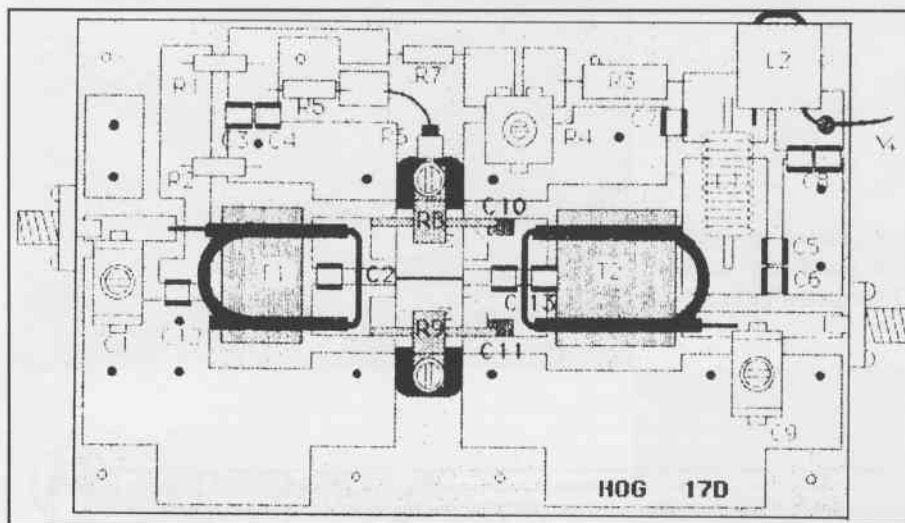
The component layout diagram. The only critical component locations are those of C2 and C13. They must be soldered in place ($\frac{1}{2}$ of C13) before the mounting of the input-output transformers.
